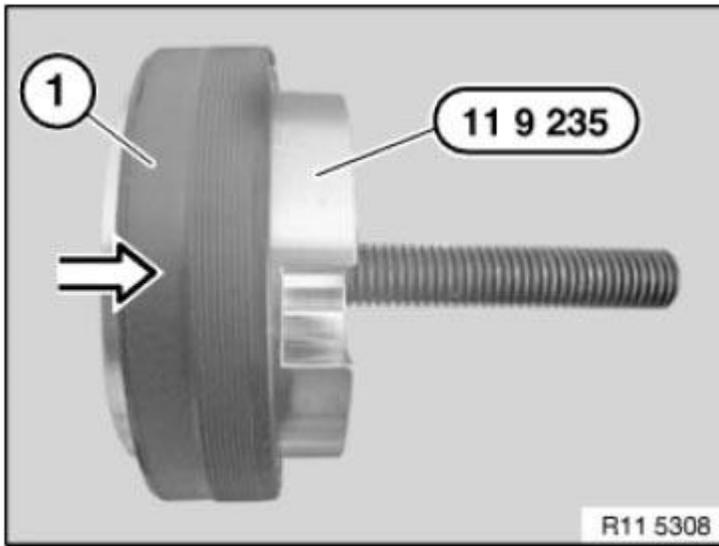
Pushing Radial Shaft Seal (11 9 235) On Special Tool
